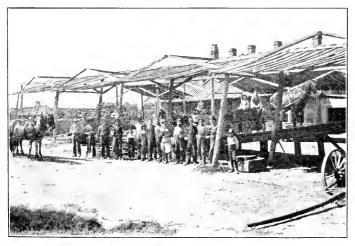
Mr. S. J. Fox, M.P.P.'s brick yard and workmen. Note method of trucking dned brick to kiln setting.
